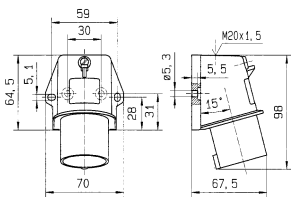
MB 206 Dim. in mm	Amp. Poles	125
